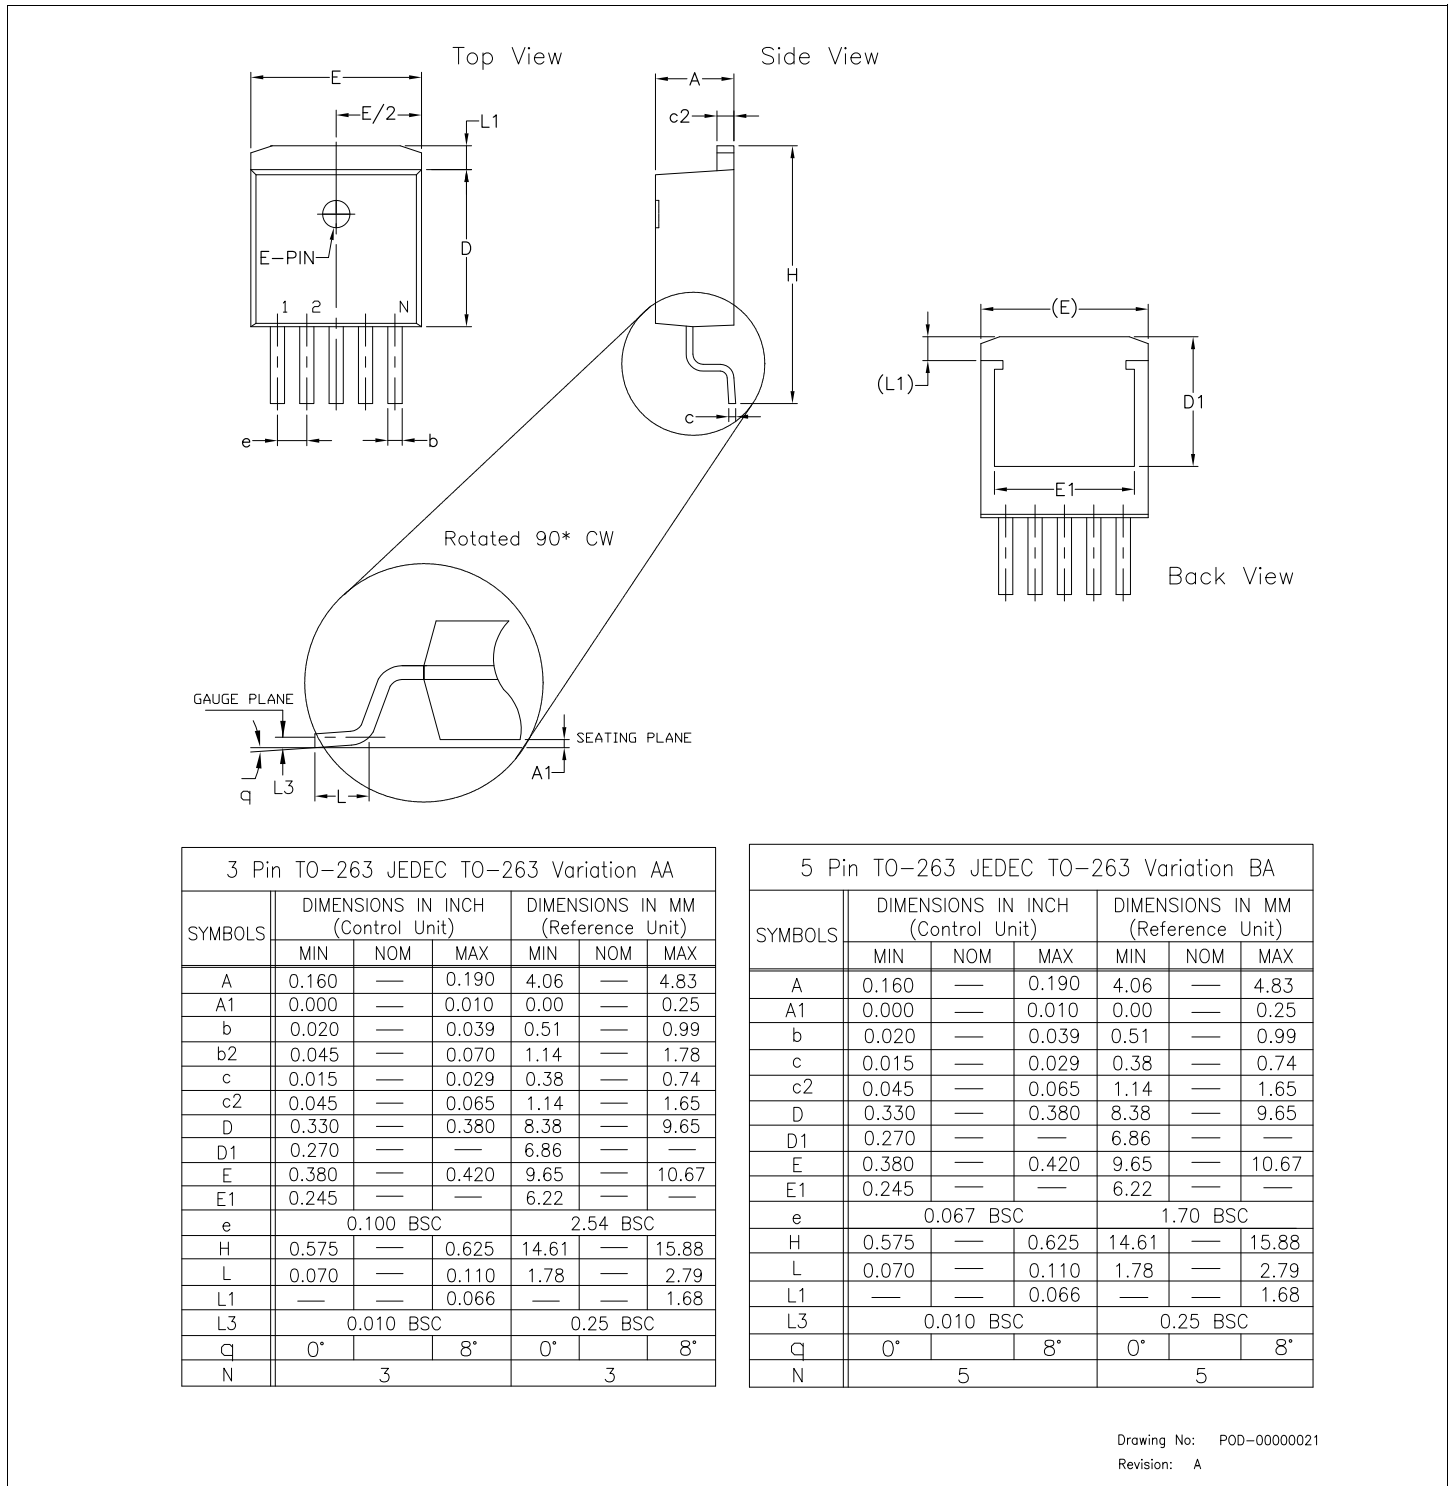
Mechanical Dimensions—3-Pin and 5-Pin TO-263
